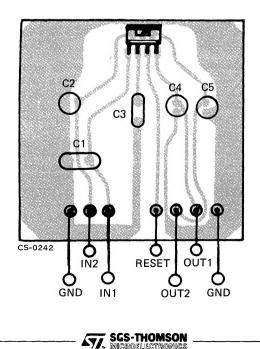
P.C. board component layout of fig. 2 (1: 1 scale)
